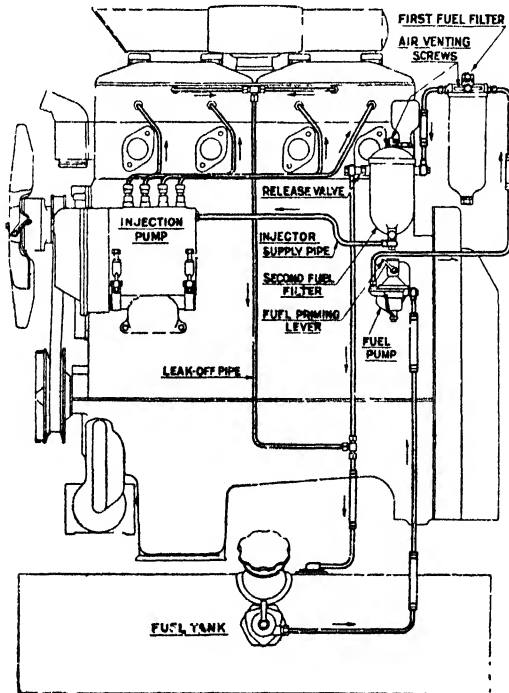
The Complete Fuel System used on the Dennis Four-Cylinder Oil Engine.
